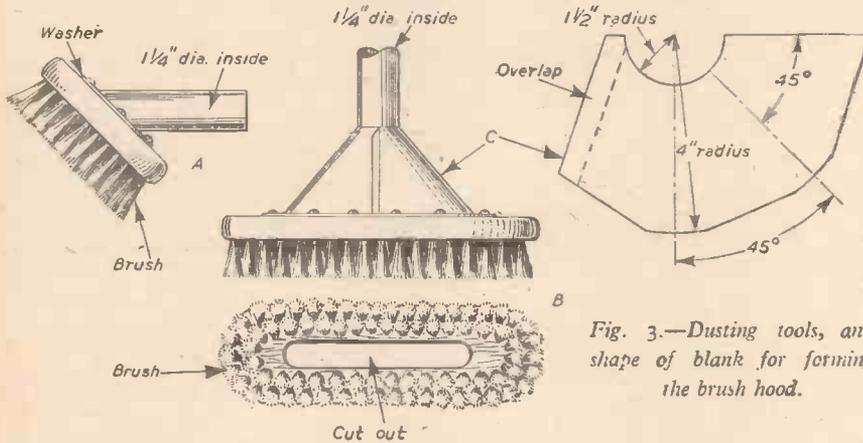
Dusting tools, and shape of blank for forming the brush hood.
